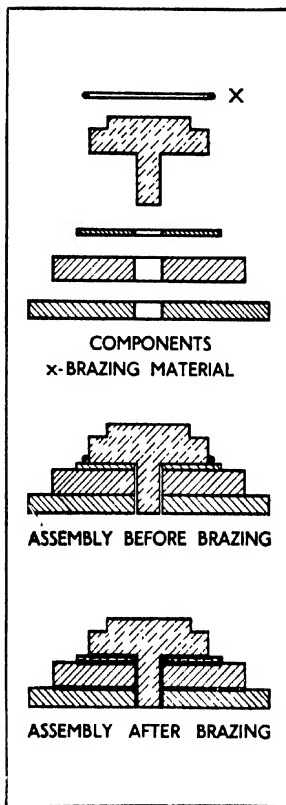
A TYPICAL ASSEMBLY OF COMPONENTS. (*Birlec, Ltd.*)
